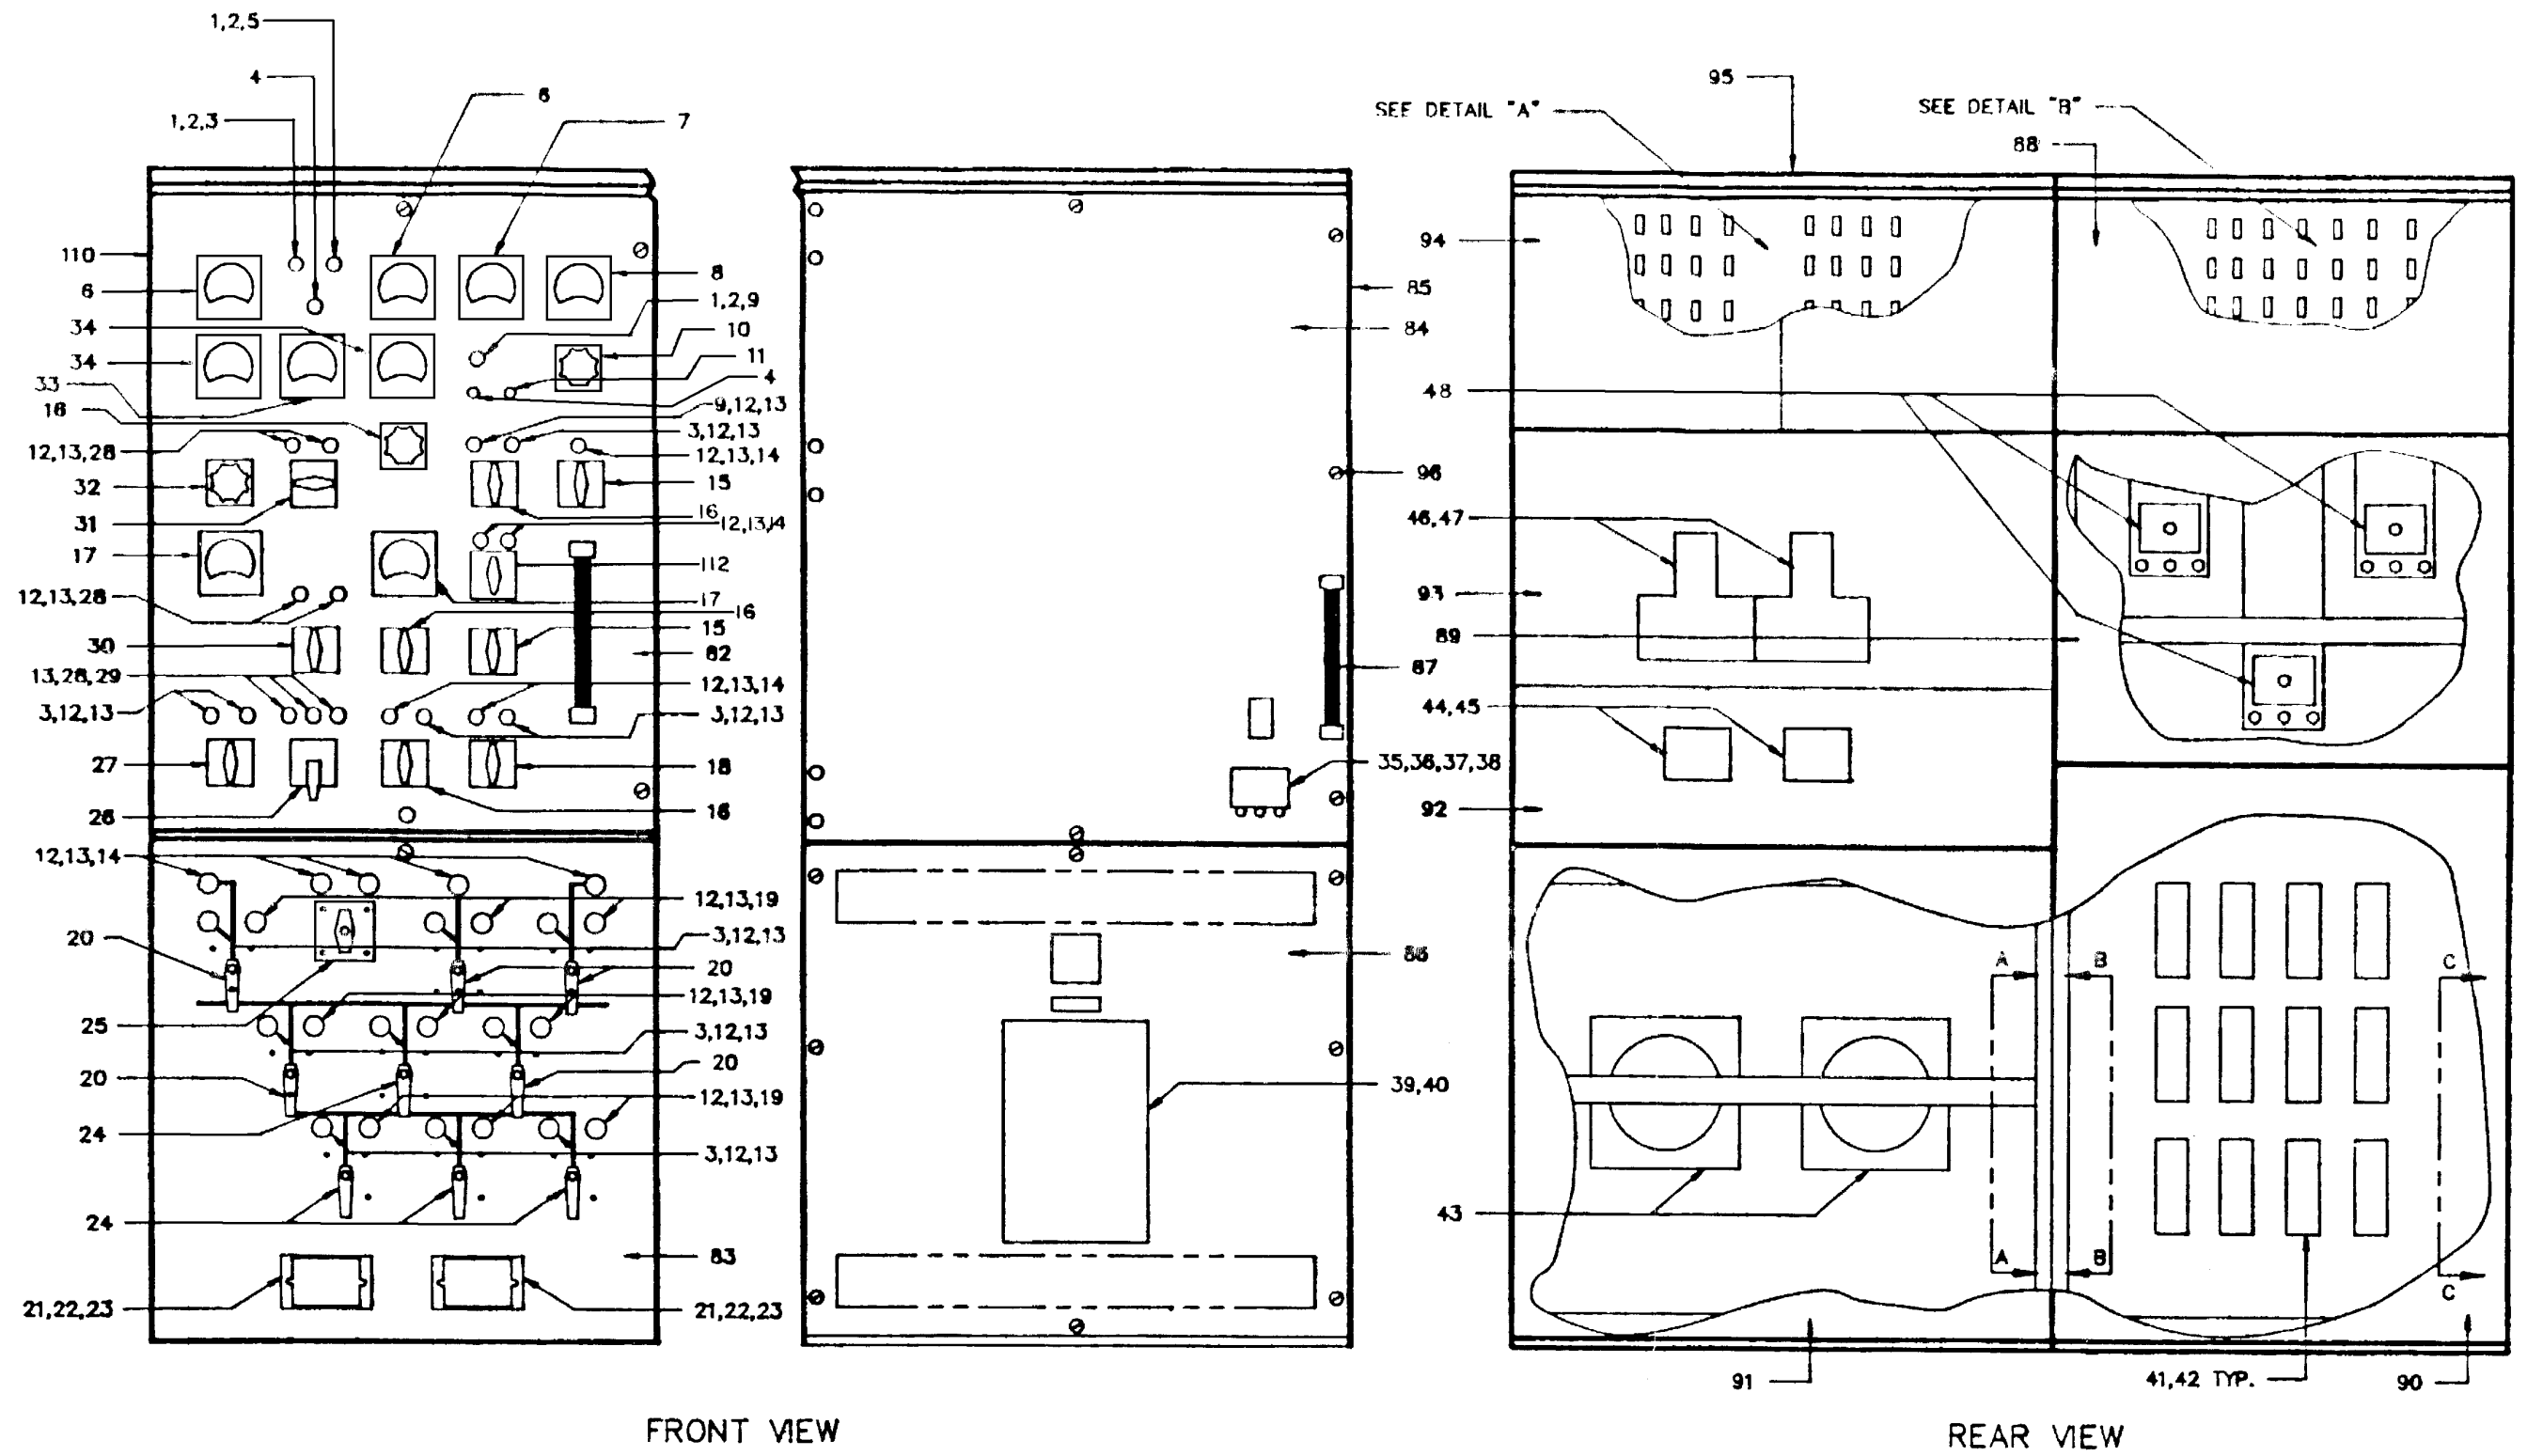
ISG Switchboard Assembly (Sheet 1 of 3)
